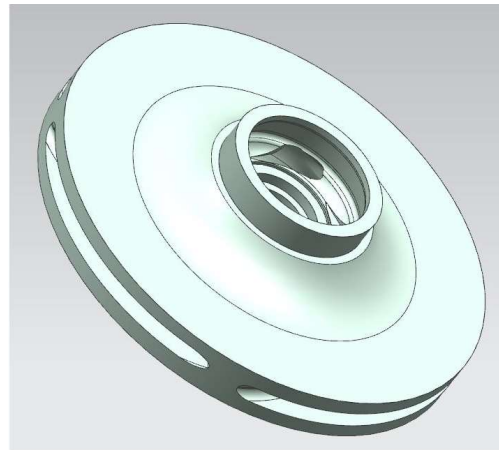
Reverse engineered CAD model of Stainless Steel impeller
